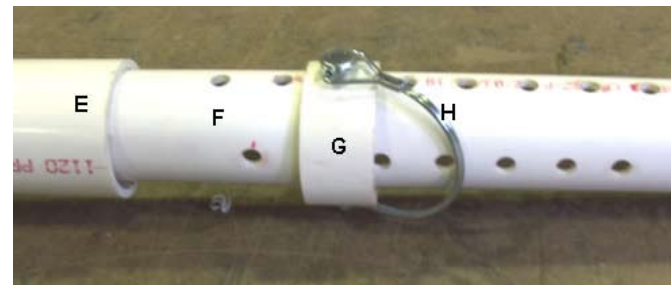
Depth control collar (G) and lynch pin (H) on ram shaft (F). [Optional 1/2" increment holes are shown in a row 90° from hole currently used by the pin; hole in collar (G) is 11/32" diameter for ease of adjustment.
